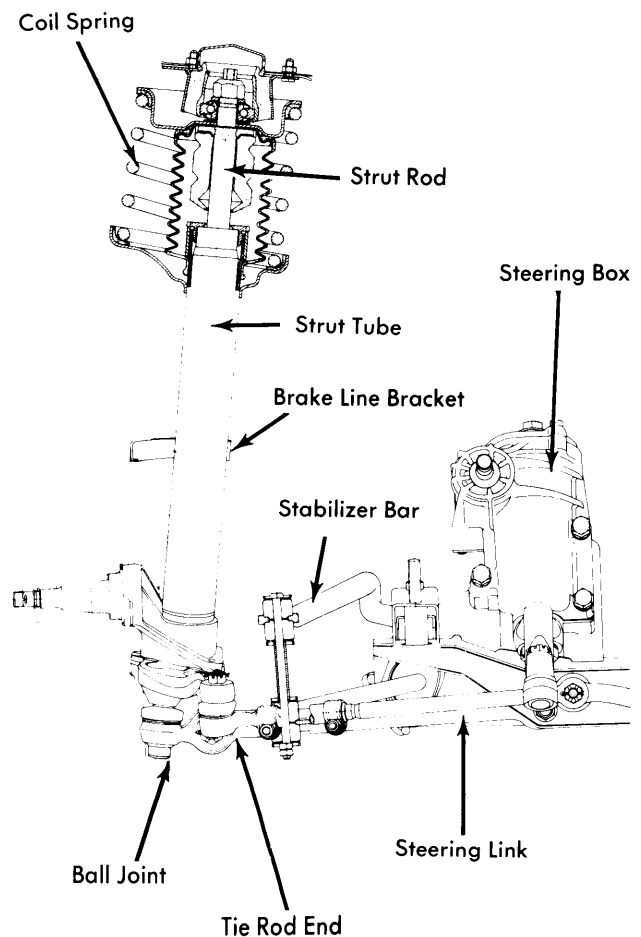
BMW 3.0 & 530i Front Suspension Assembly
